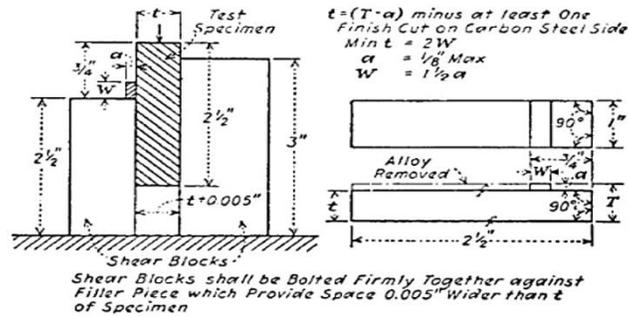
Shear test specimen in accordance with ASTM A264 [14]
